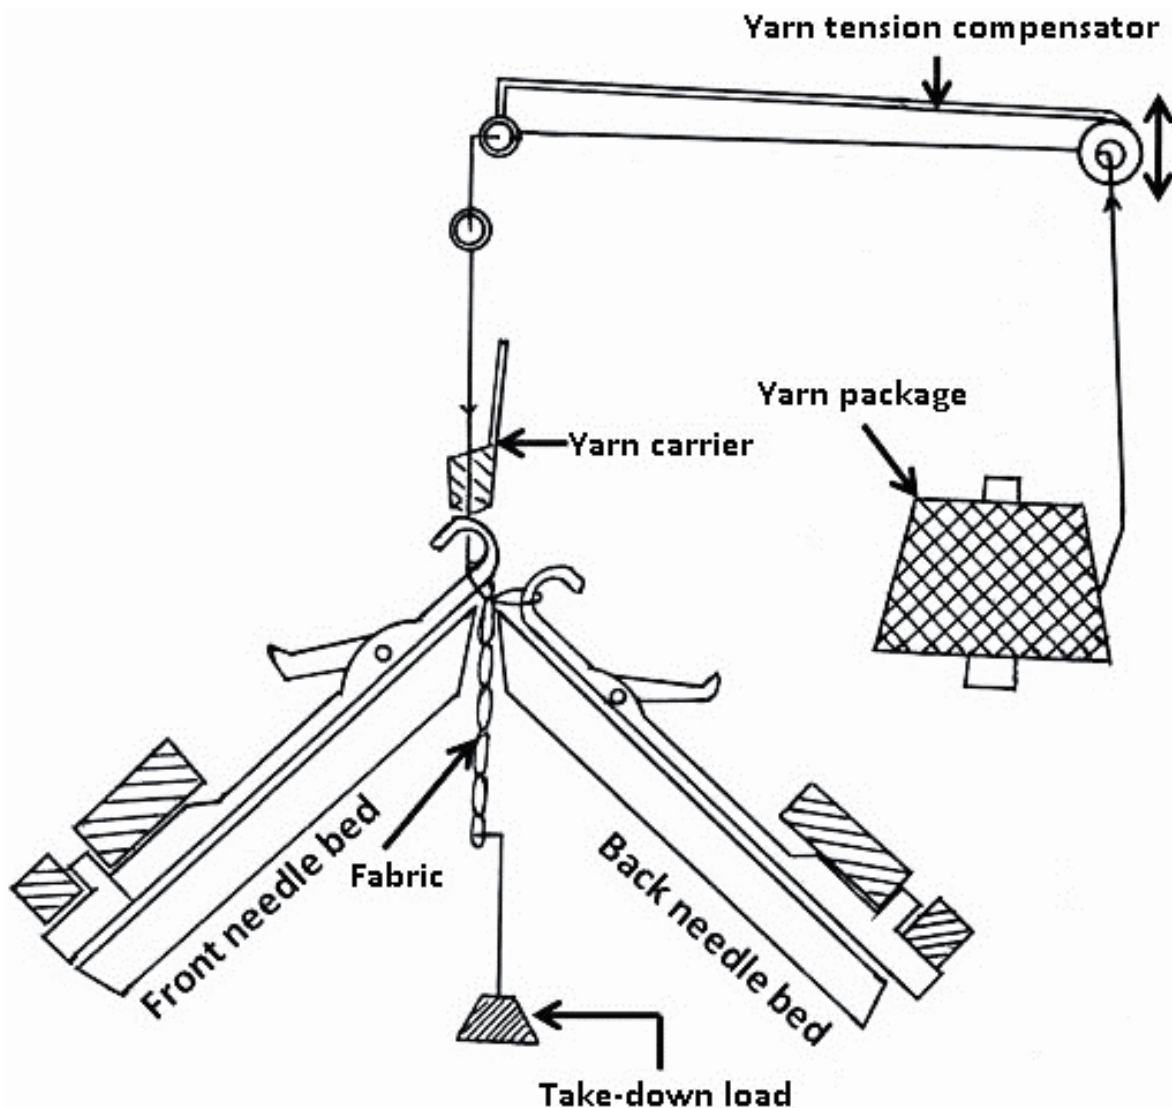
Cross-sectional view of simple V-bed Rib machine.
